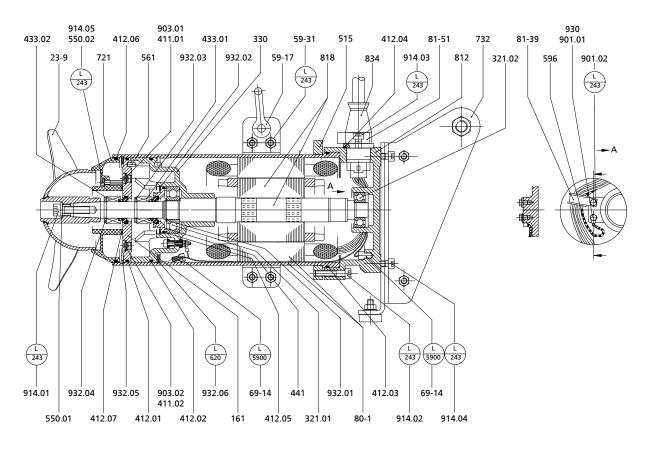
General assembly drawing Amamix 200, motor housing material stainless steel
